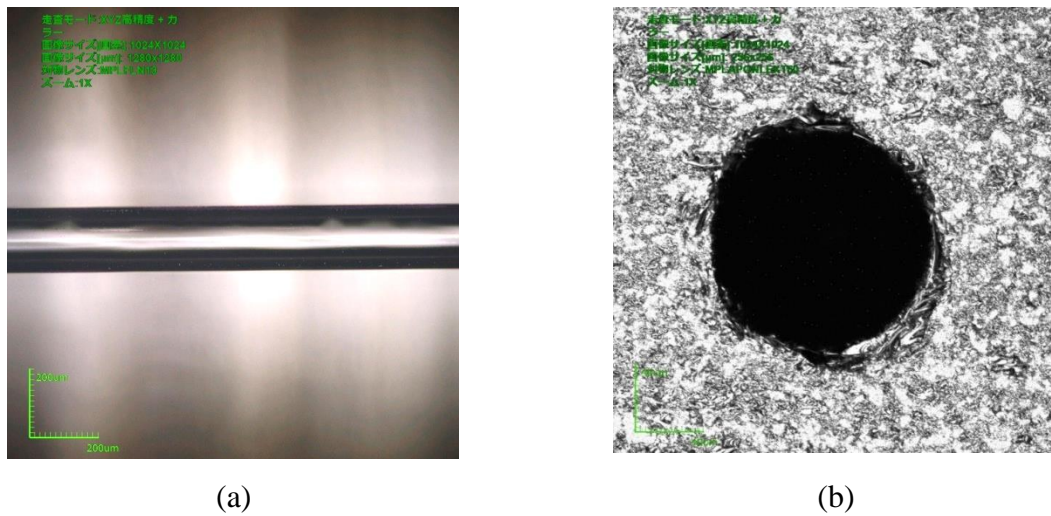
Measurement of diameter using microscope (a) side (b) face end views of capillary
